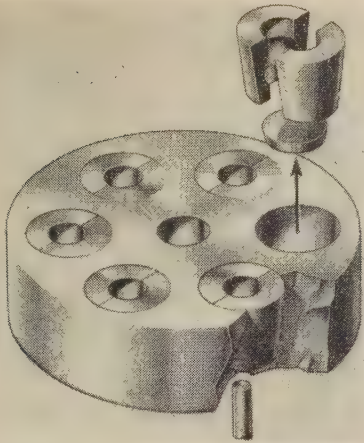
Typical production die holder for explosive forming of several parts in one shot. With the turntable arrangement, dies and parts can be released successively from the die holder.
